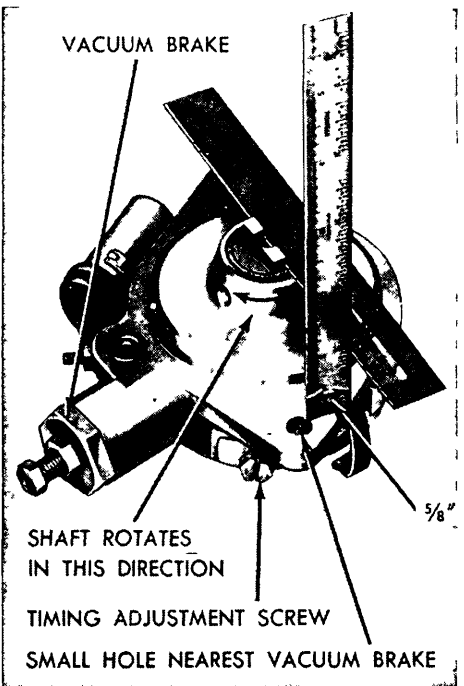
Timing distributor on Ford six-cylinder engines using vacuum brake type distributors when distributor fixture is not available
